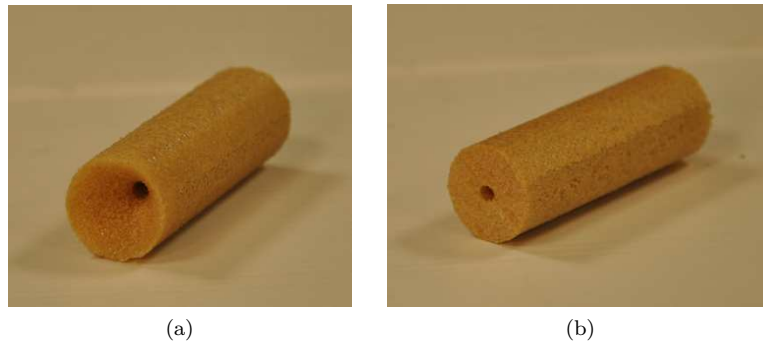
Picture of the Divinycell H130 backing layer. Machined out to be assembled into the steel casing. Figure (a) shows the rearmost side of the backing layer, with the cone visible. (b) shows the face of the backing layer which is connected to the piezoelectric element.
